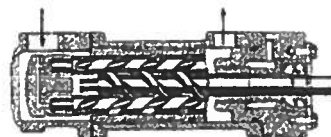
Three-screw single end pump (untimed)
